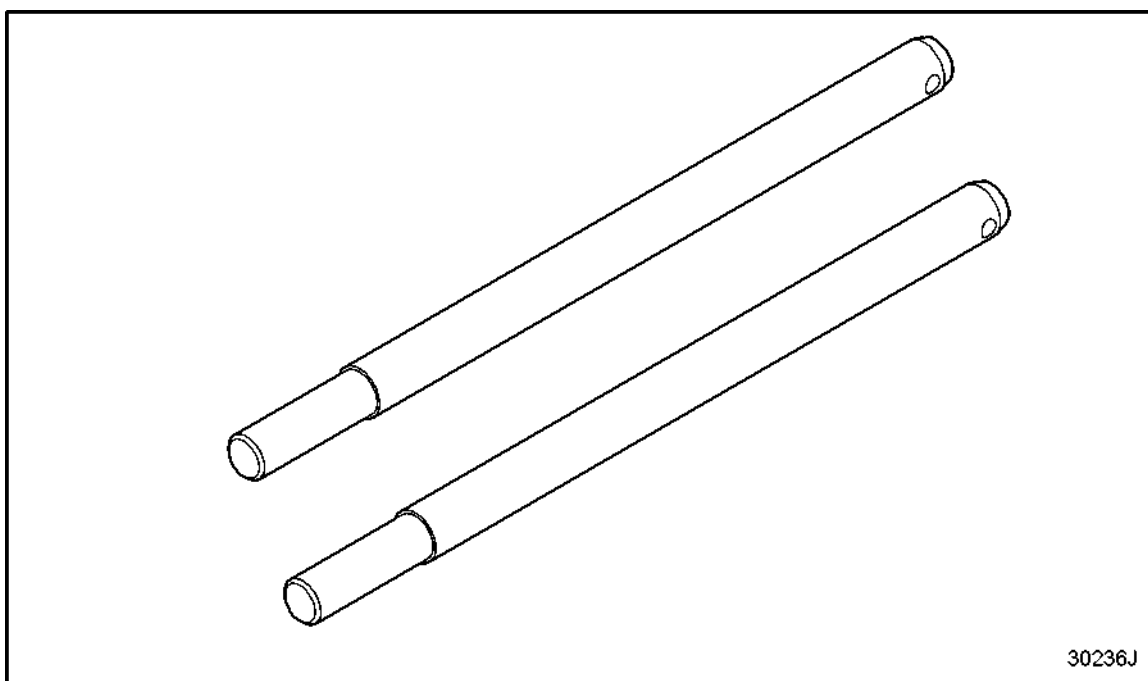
Cylinder Head Guide Studs,J 42954
